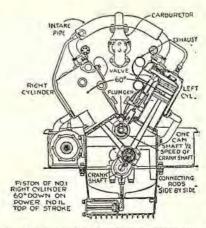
End sectional view of Packard "twin six" engine. Cylinder 1R is 60° down on power while 6L is on dead center.
